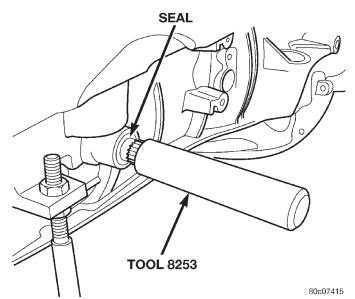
Install Selector Shaft Seal Using Tool 8253
